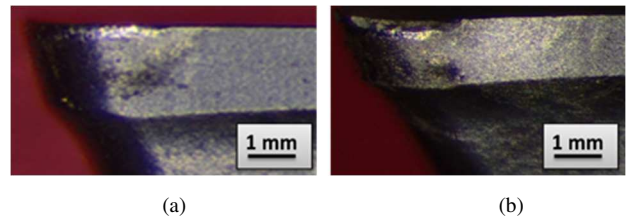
Flank wear (V_b) on dry machining of (a) SLM and (b) C&W.
